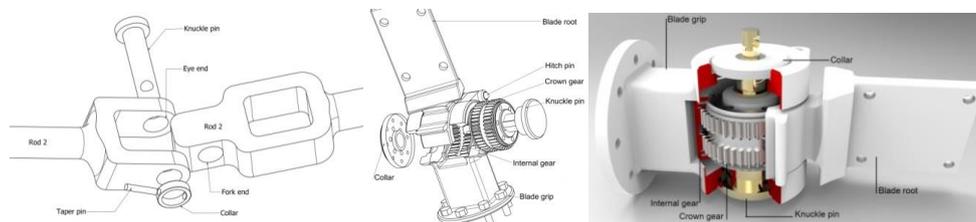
A conventional sold knuckle joint and a knuckle joint with gear coupling
